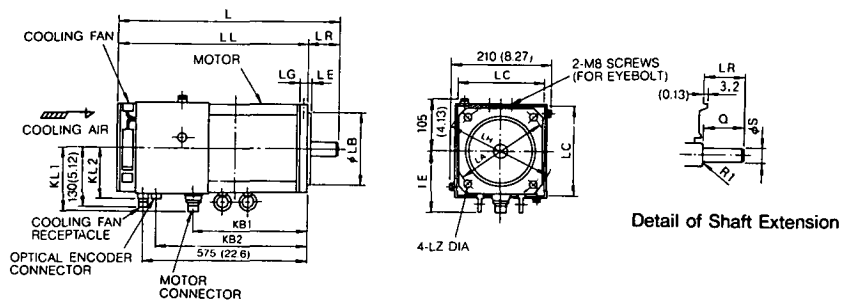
USAMED-12B□□2 to -44B□□2 (Straight Shaft)
